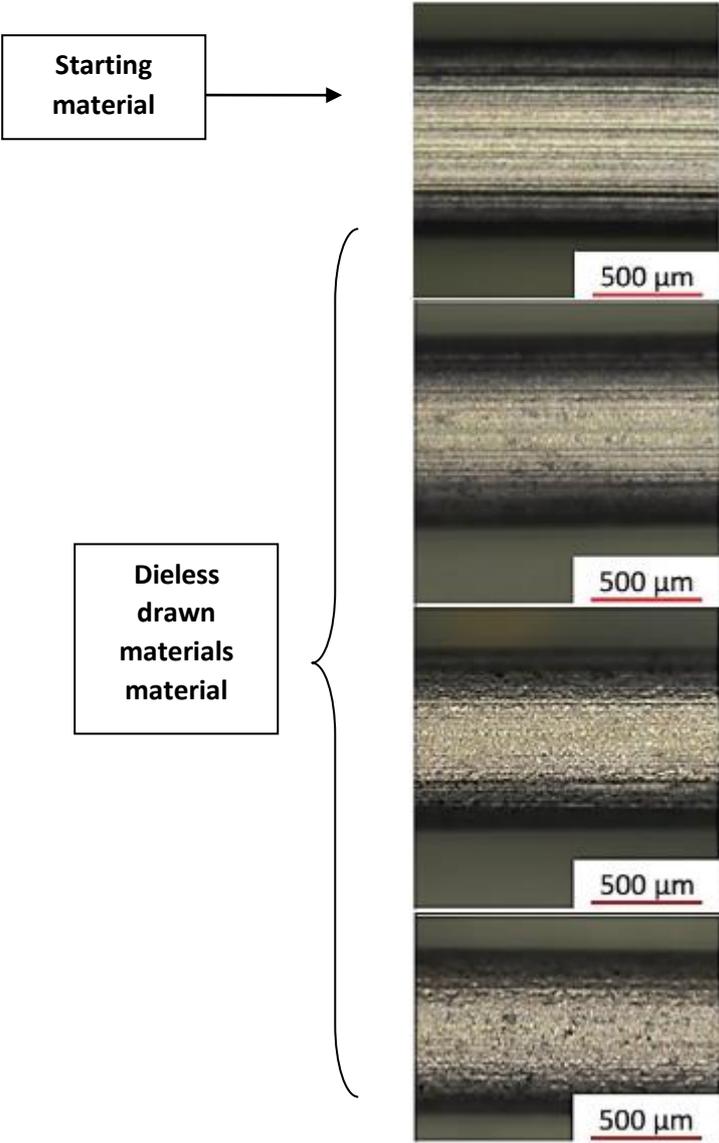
Wires made of the CuZn37 alloy before (1) and after (2) dieless drawing [1].
